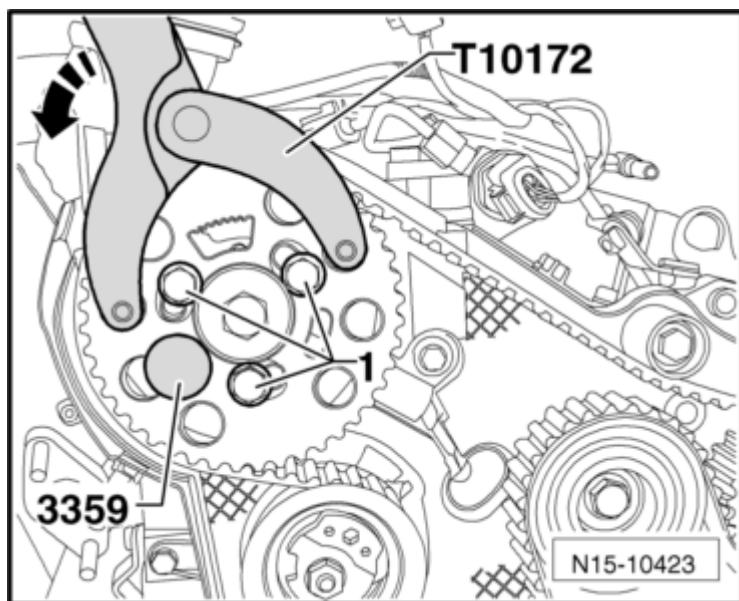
Identifying T10172 Pushed In -Direction Of Arrow- And Bolts -1-
